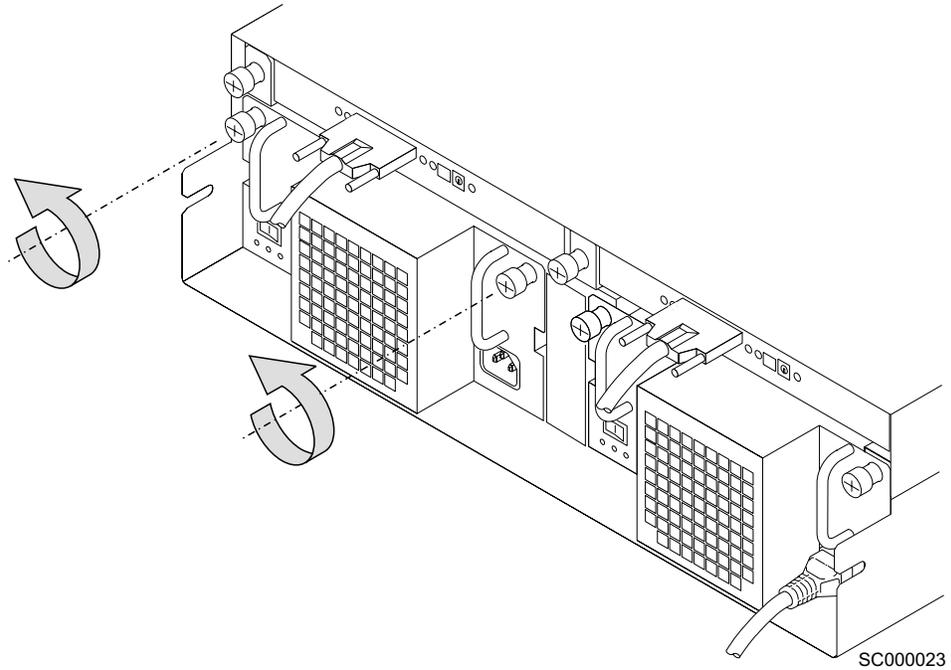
Unscrewing the thumbscrews on the fan-and-power-supply assembly
